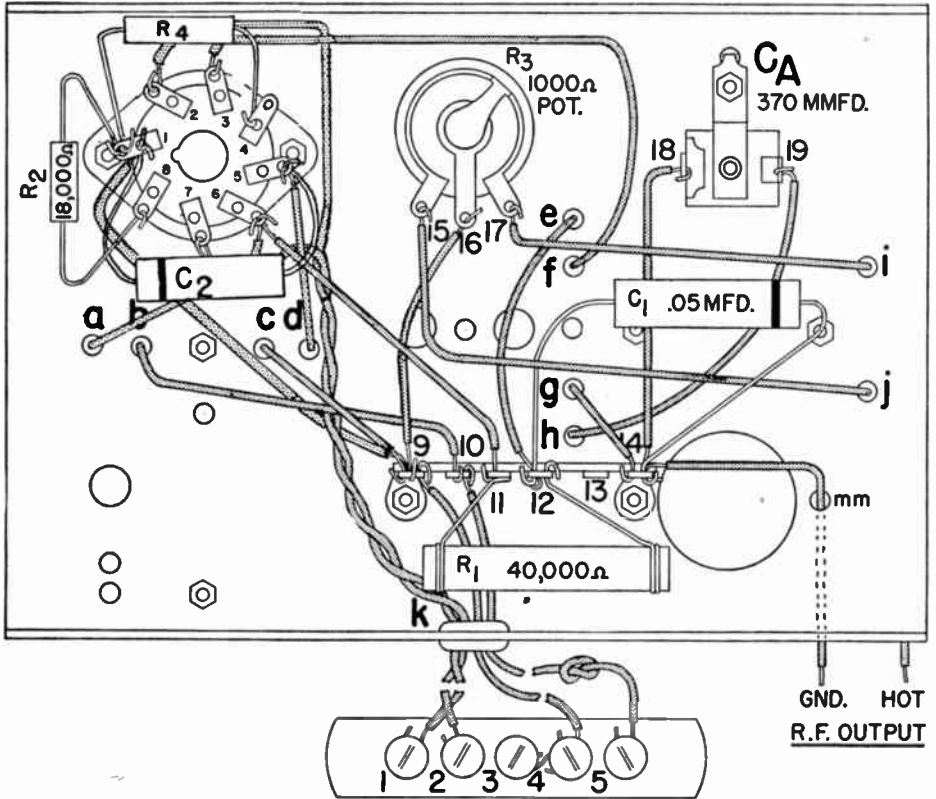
Bottom view of the r.f. chassis, showing how the completed plate-modulated r.f. oscillator should appear after assembly has been completed. Connections on top of the chassis for this plate-modulated oscillator are the same as for the grid-modulated oscillator except for the r.f. output leads, and consequently the top view in Fig. 30 can be used as a guide for building this plate-modulated r.f. oscillator, if desired.
